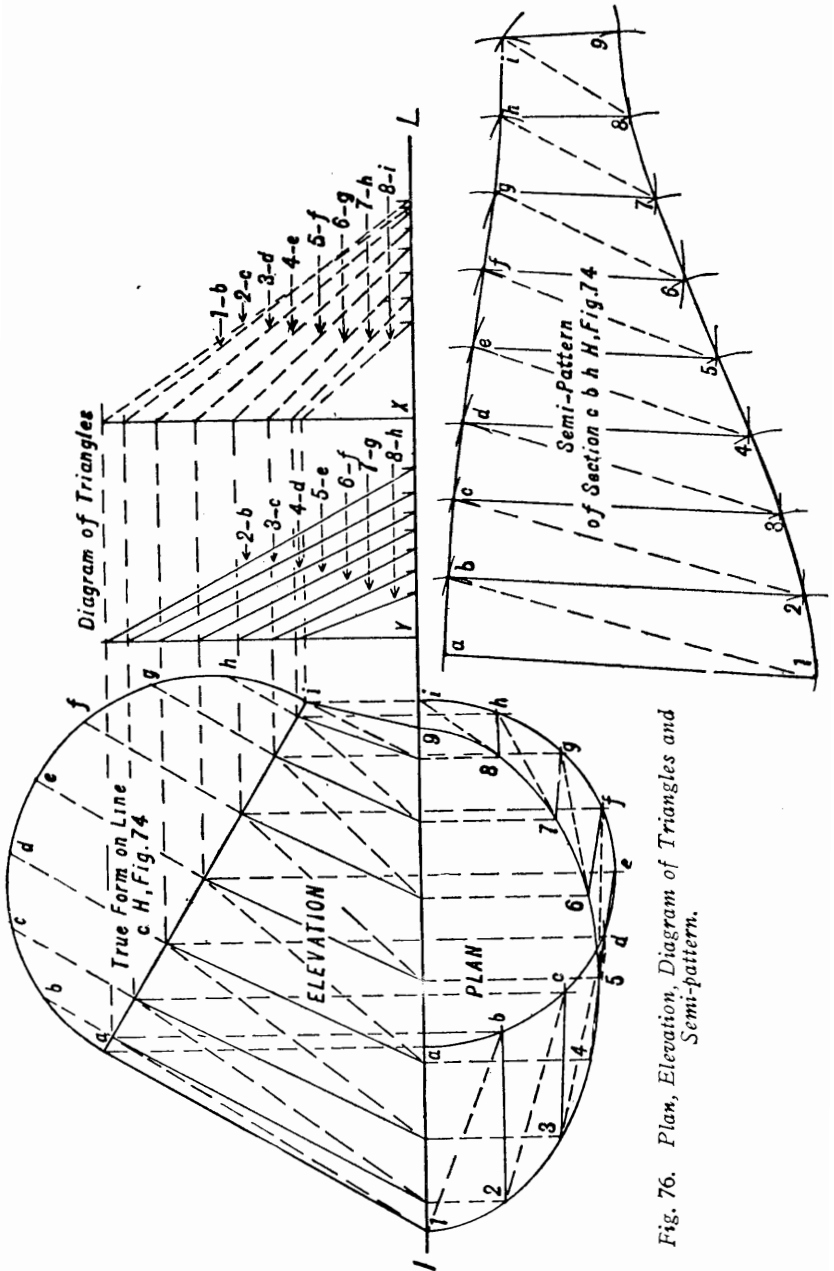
Plan, Elevation, Diagram of Triangles and Semi-pattern.
